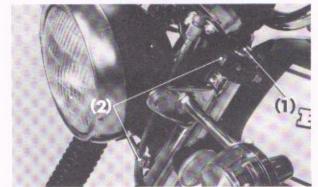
(1) Front fork bolt (2) Fork attaching bo
